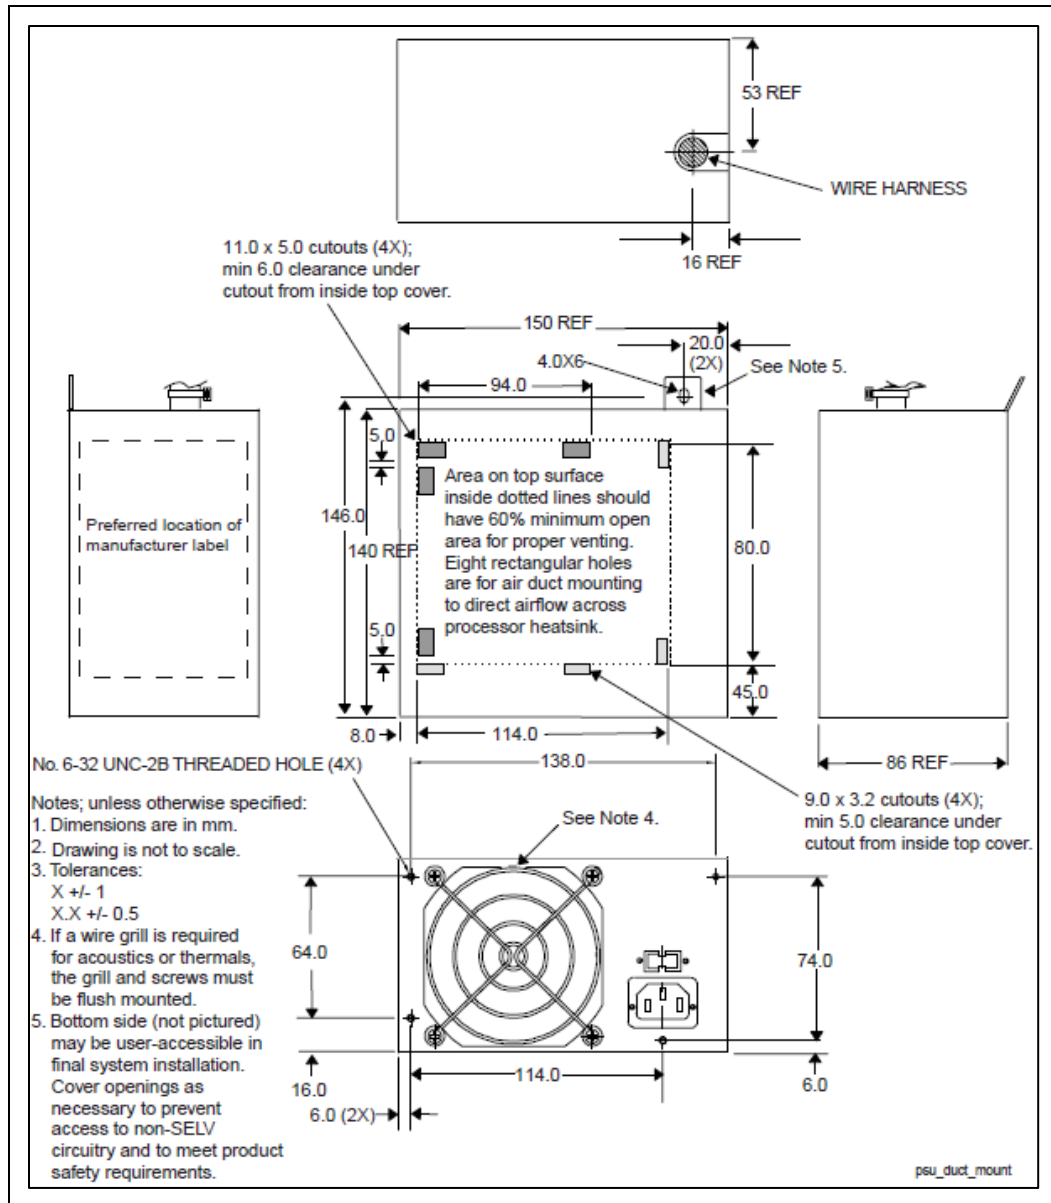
ATX12V Power Supply Dimensions for Chassis Requiring Top Venting
